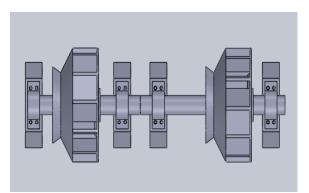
, lift and thruster impeller assembly on the stand (top view)
